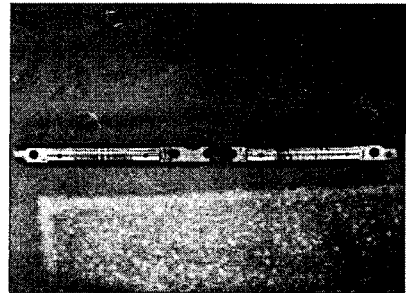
Failure of rocker arm shaft at 4-Cylinder SOHC engine
